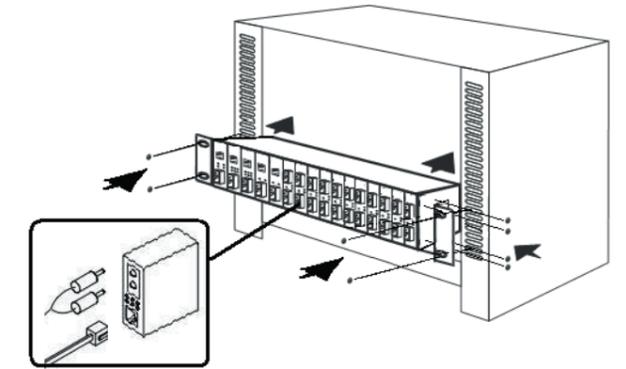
Installing Media Chassis in Wire Closet Rails
